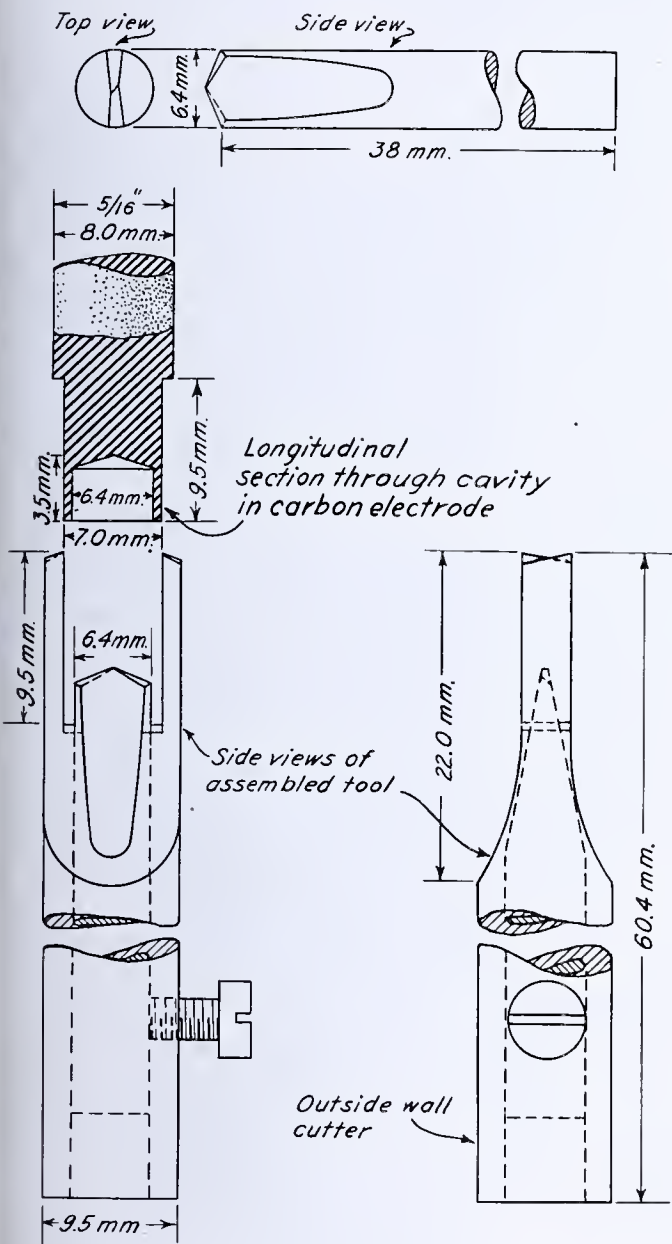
CARBON DRILLING AND CUTTING TOOL DRILL BIT
